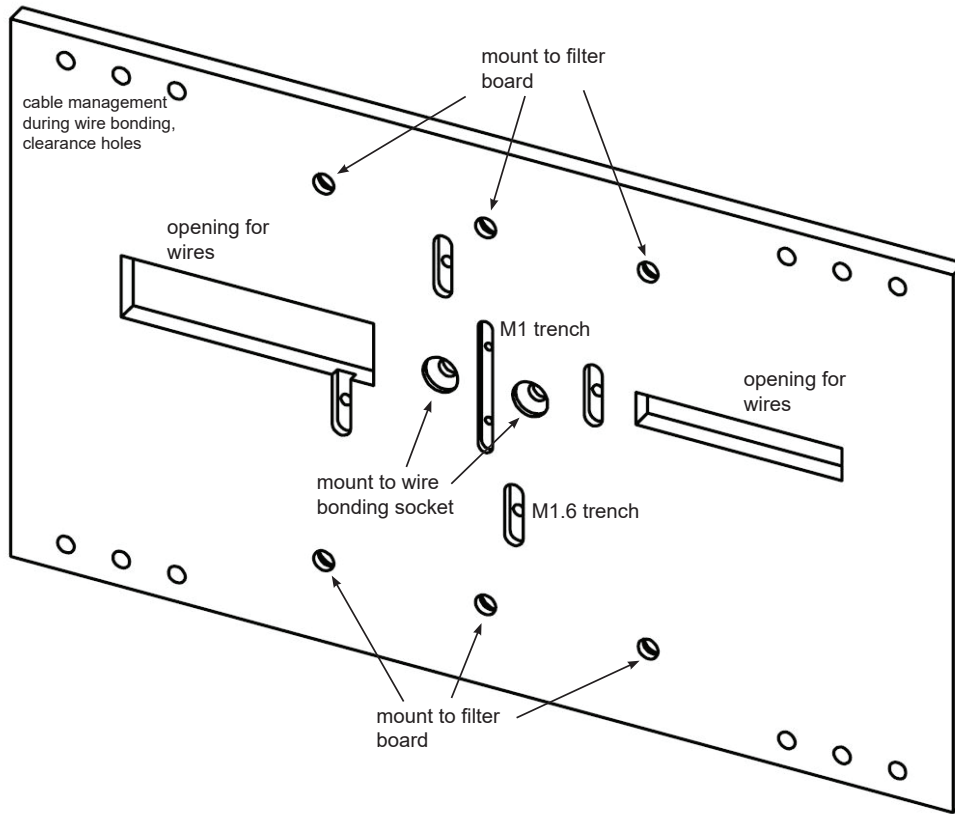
Custom-made trap assembly tool, which is used to assemble the alumina layers and during wire bonding. The tool is a solid aluminum plate with outside dimensions 100 mm x 170 mm x 4 mm. For the trap assembly, M1 and M1.6 nuts are placed in the corresponding trenches to prevent movement of the nuts. After trap alignment the filter board is mounted to the support layer, which is placed below the trap. Subsequently, wire bonding is executed and the assembly tool is fixed by corresponding screw holes to the heated wire bonding socket. The filter board is then fixed to the assembly tool by screws which are counteracted with nuts from the back side. Several openings and clearance holes allow for proper cable management of the numerous DC and RF supply wires.
